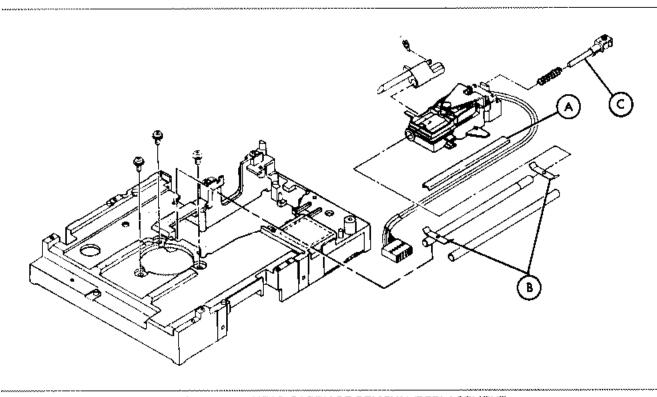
HEAD CARRIAGE REMOVAL/REPLACEMENT
